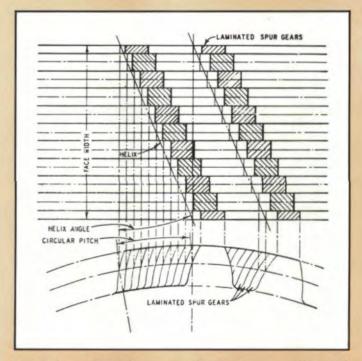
Diagram showing how a series of laminated spur gears with the teeth set at an angle give similar tooth action to a helical gear.
